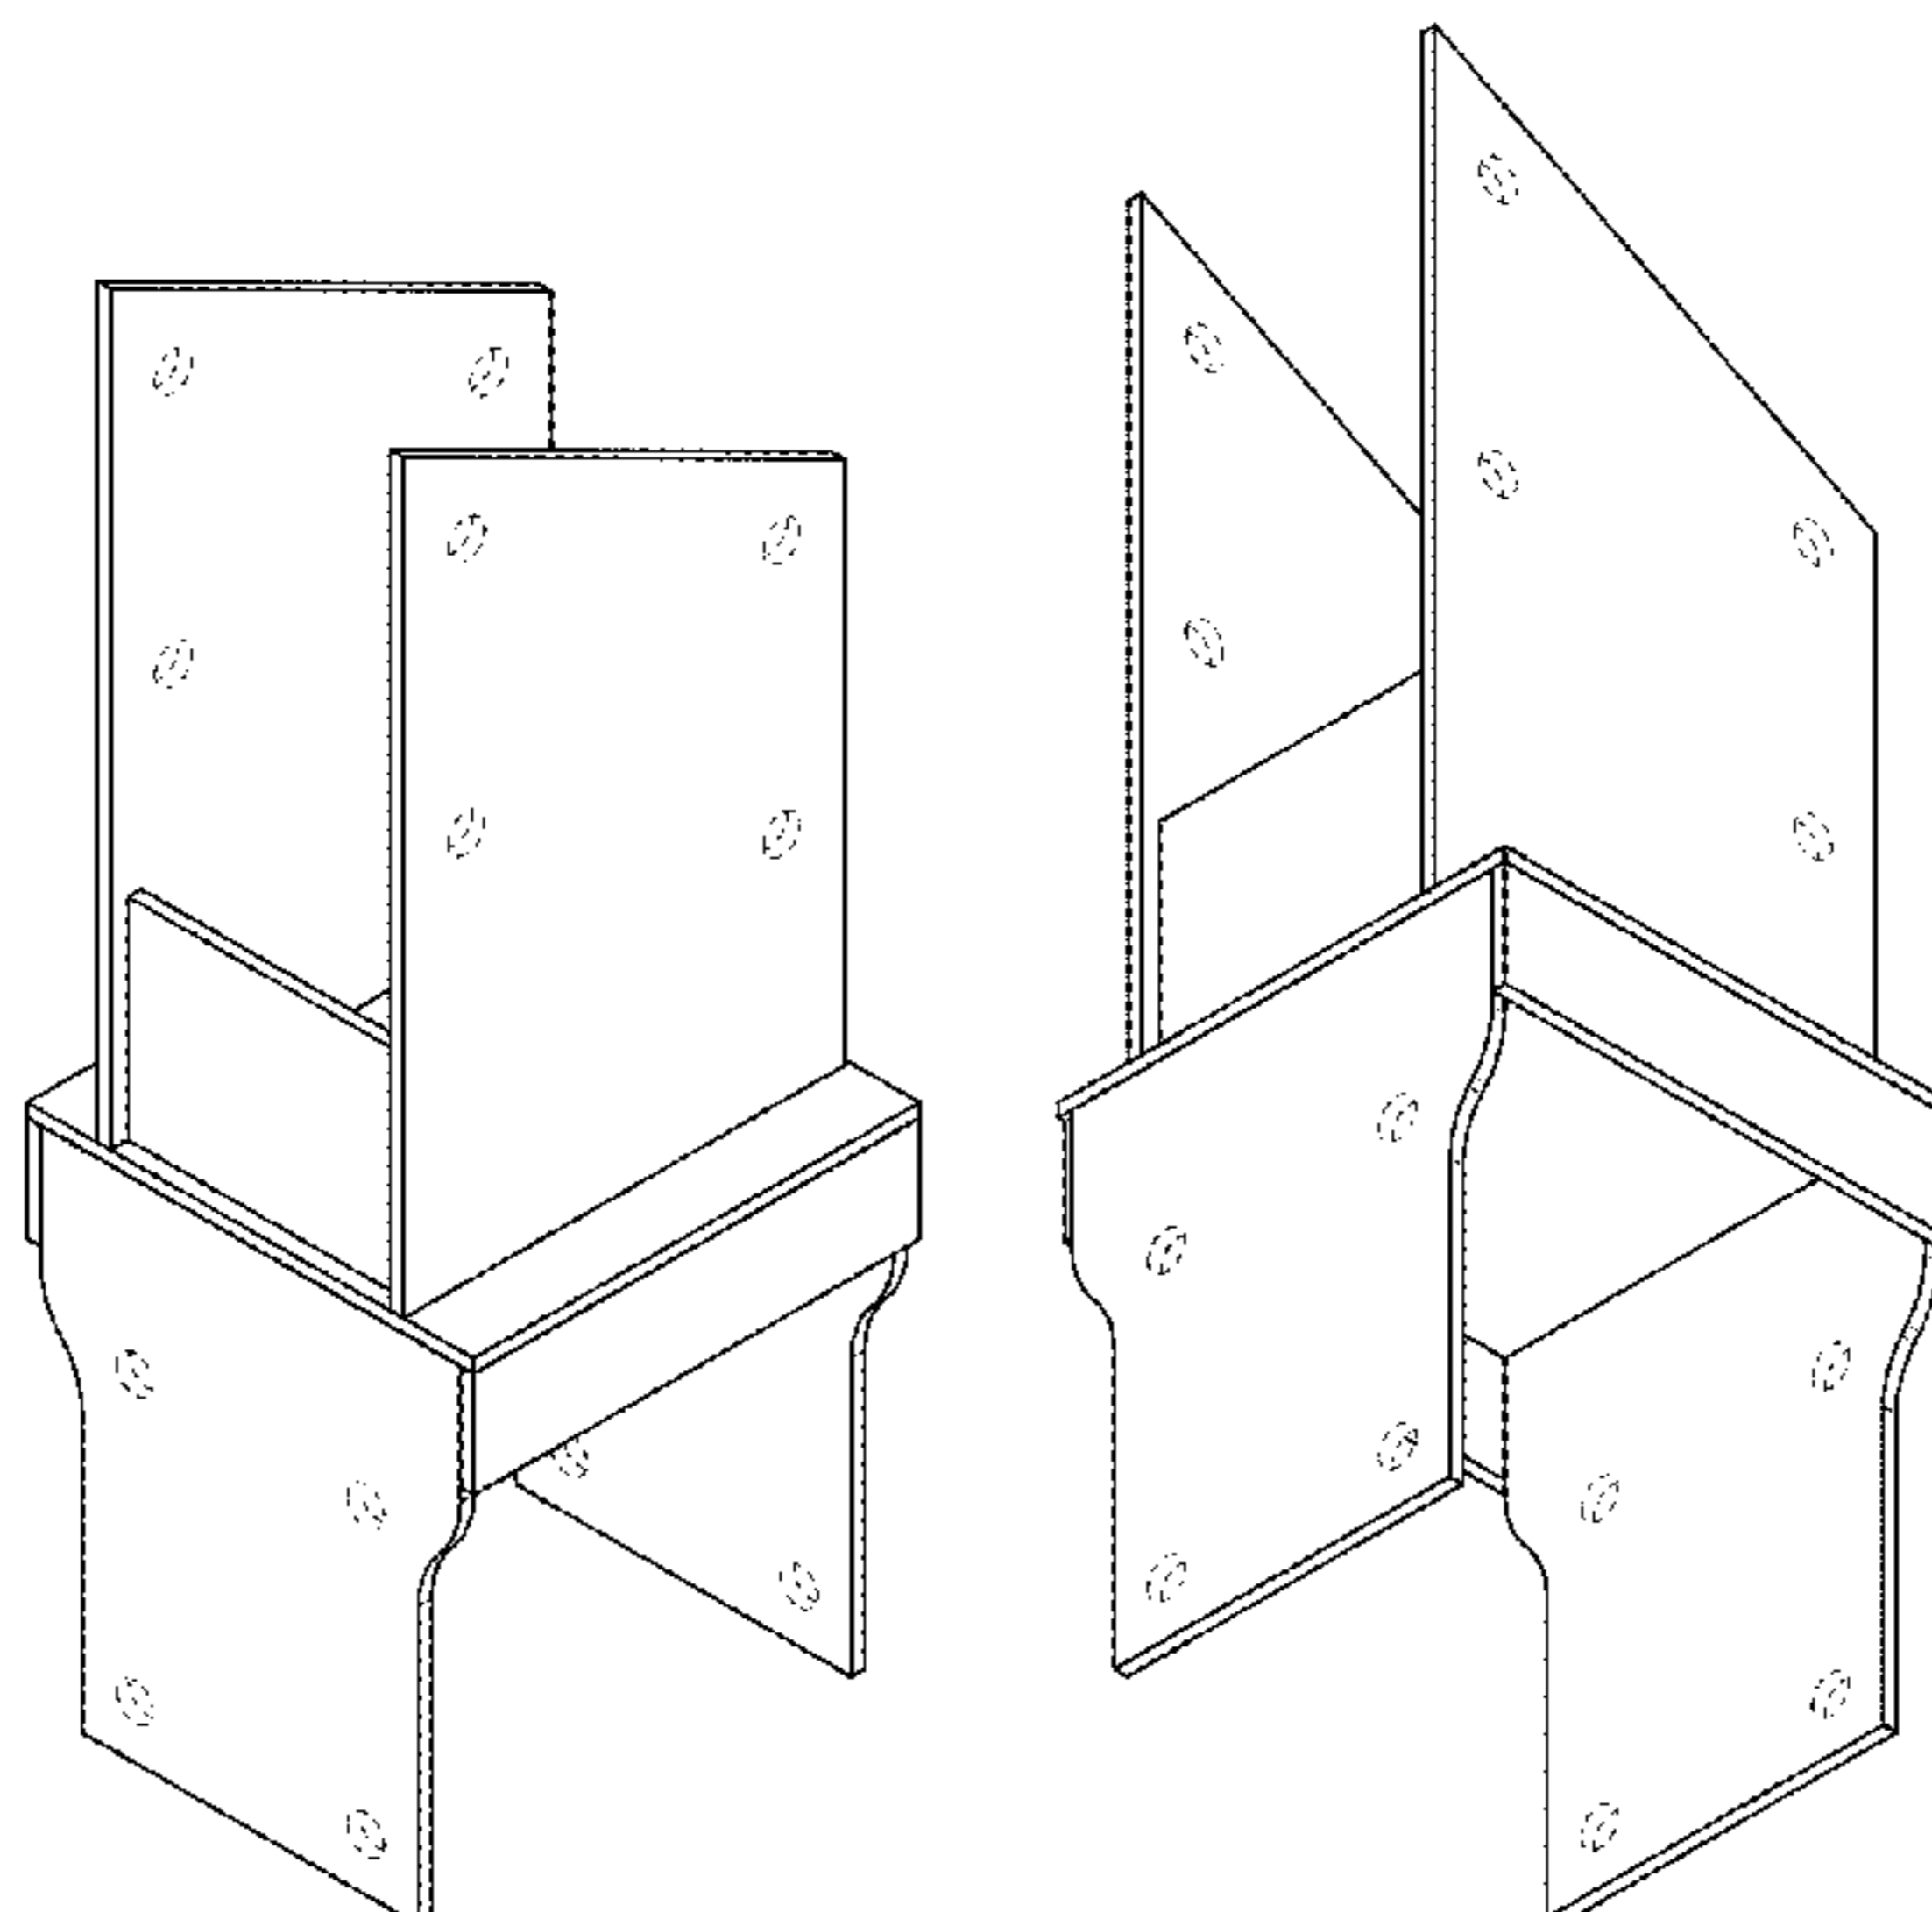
is a left side perspective view showing the rafter bracket of FIG. 1.
